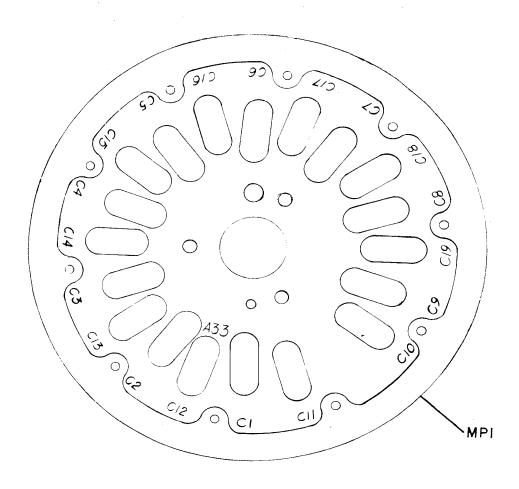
100 kHz Rotor Subassembly A2A4A33, Component Locations
